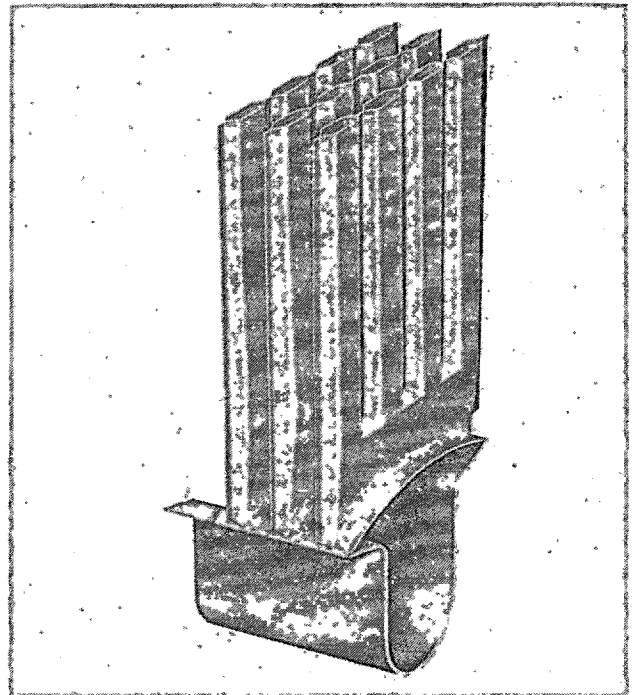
Radiator Section Showing Joints Formed with Mash-Seam Welder
